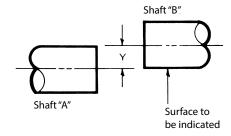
To measure offsets with a dial indicator, attach the indicator to shaft "A," rotate shaft, and indicate to the periphery of shaft "B." To obtain actual displacements of shafts, divide dial indicator readings by 2.
